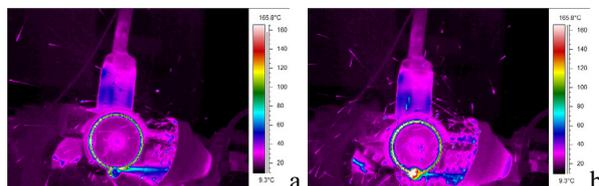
Consecutive thermograms of the cutting disk in the process of cutting
